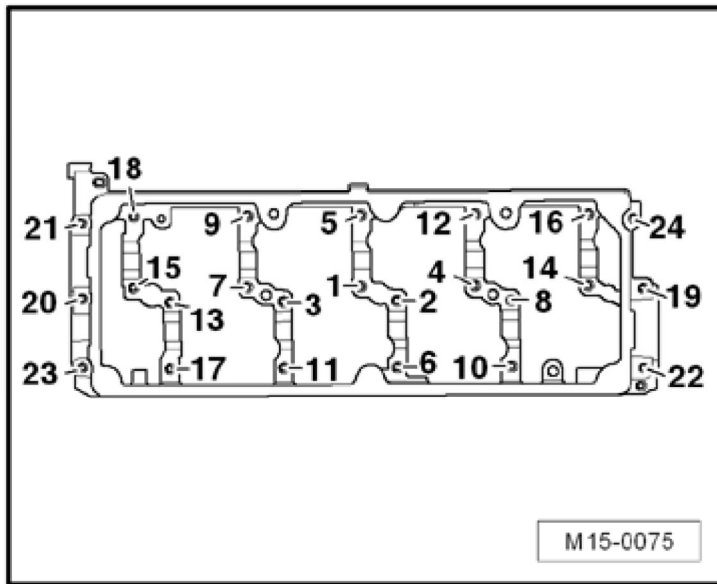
Identifying Bearing Frame Bolt Tightening Sequence
